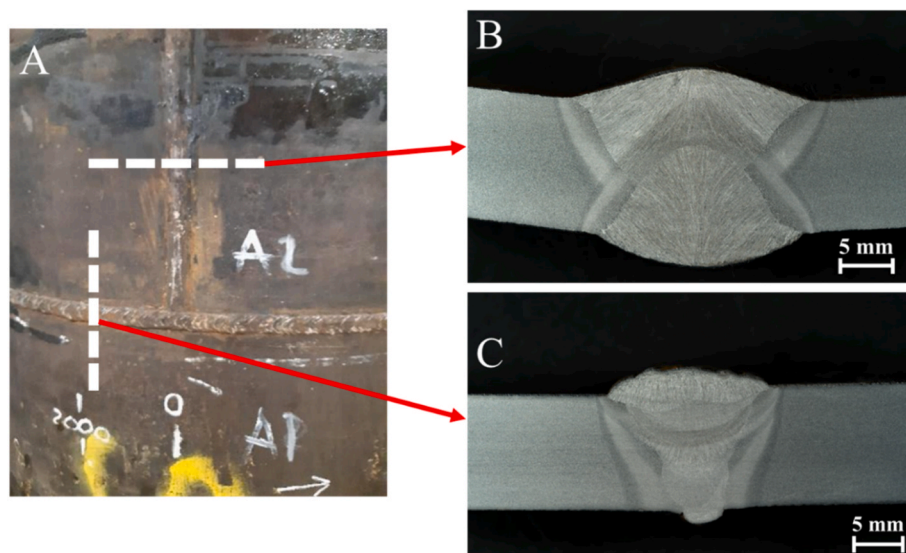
(a) API 5L X52 pipe. (b) Macrographs of longitudinal and (c) circumferential welding.
